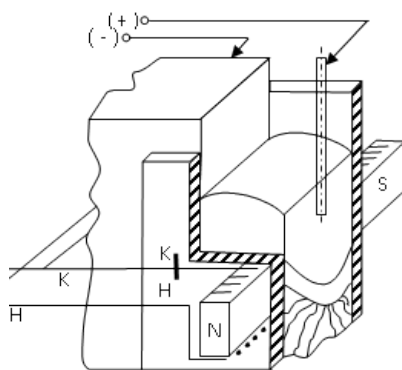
Scheme of ESW with electromagnets mounted on formers¹
